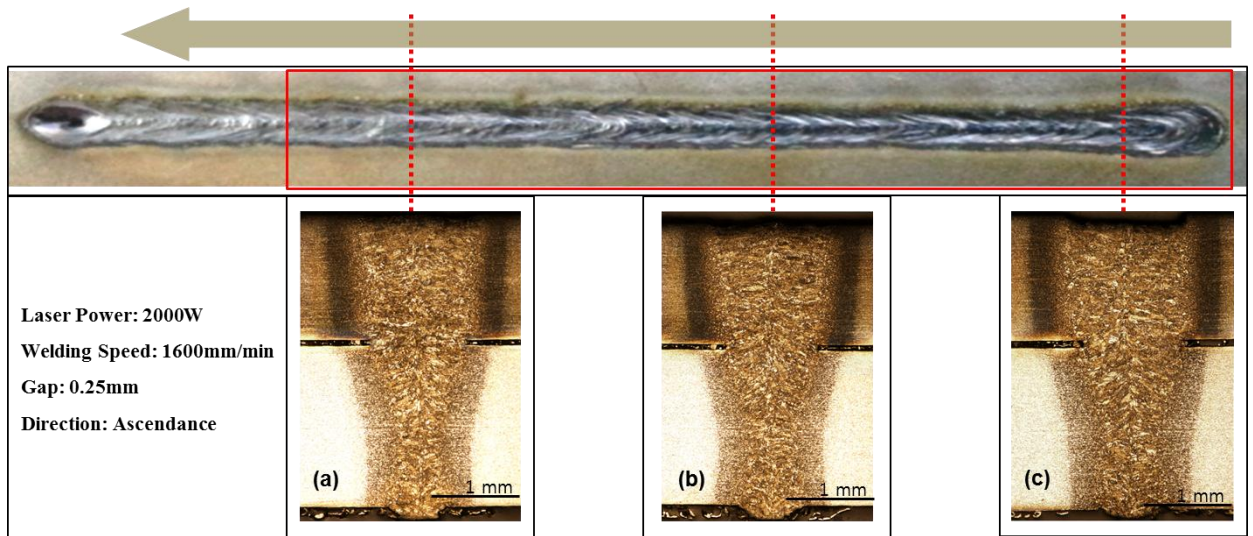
Laser Power: 2000W, Welding Speed: 1600mm/min, Gap: 0.25mm, Direction: Ascendance
